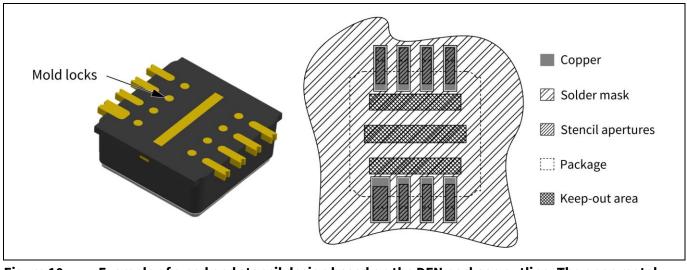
Example of a pad and stencil design based on the DFN package outline. The open metal from mold locks in the package landing area (left) are marked as a keep-out area on the PCB design (right).
